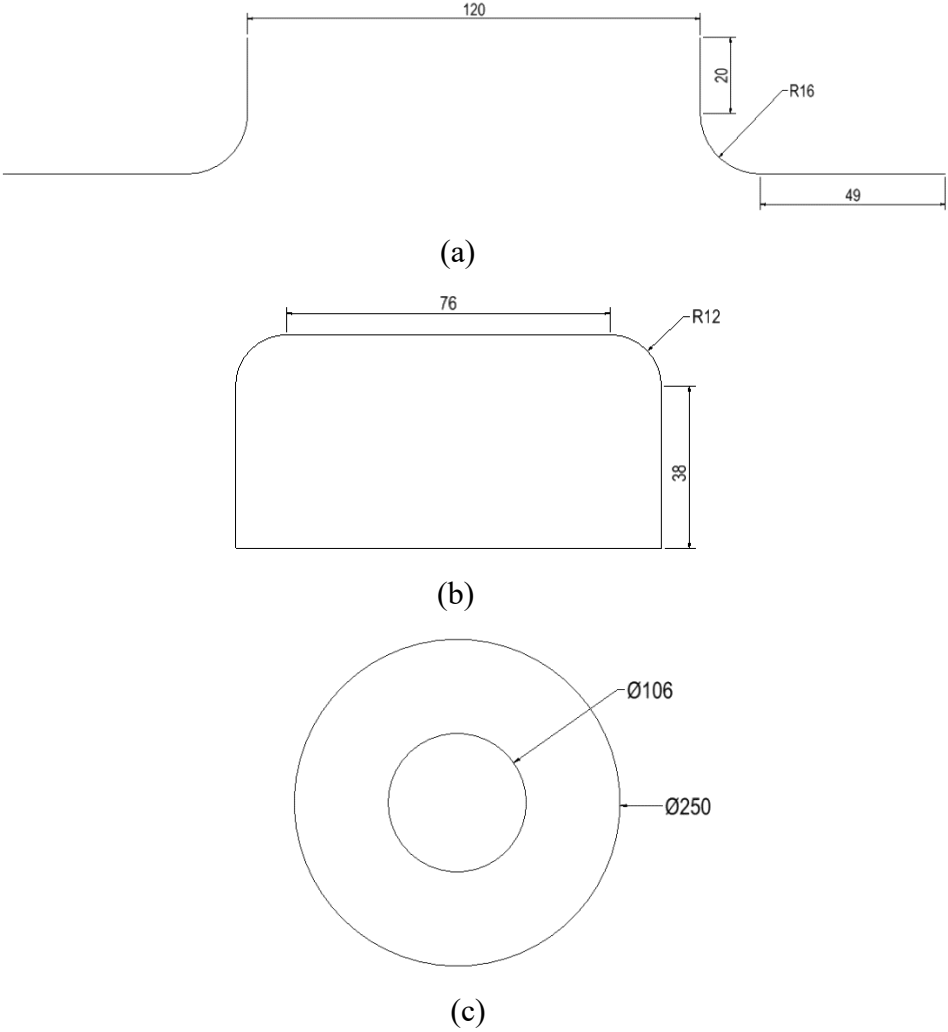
Drawings of Marciniak test components (a) Die (b) Punch (c) Holder
